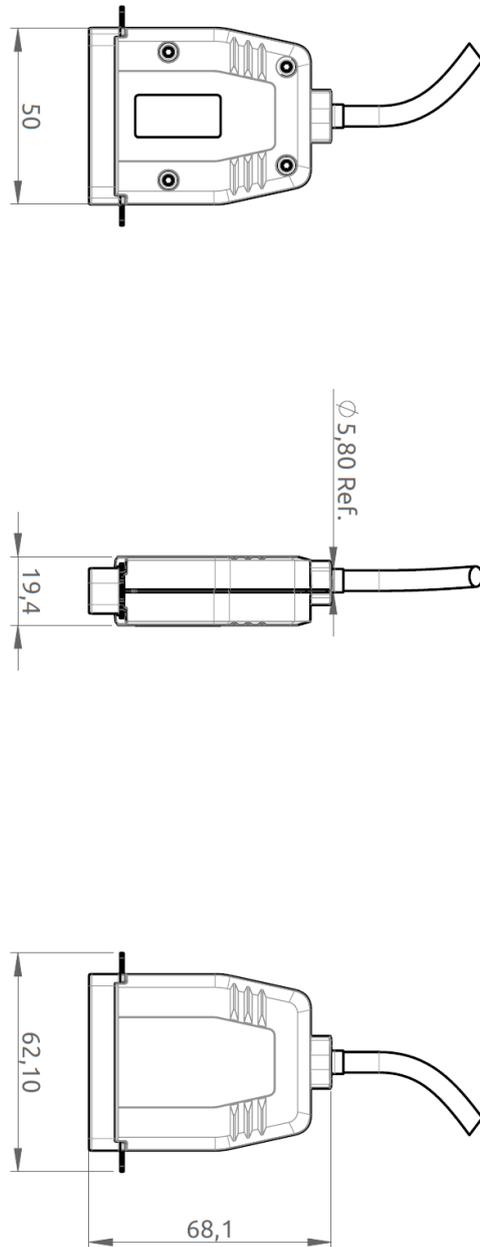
Outline Drawing: LT-3160S Printer Adapter
